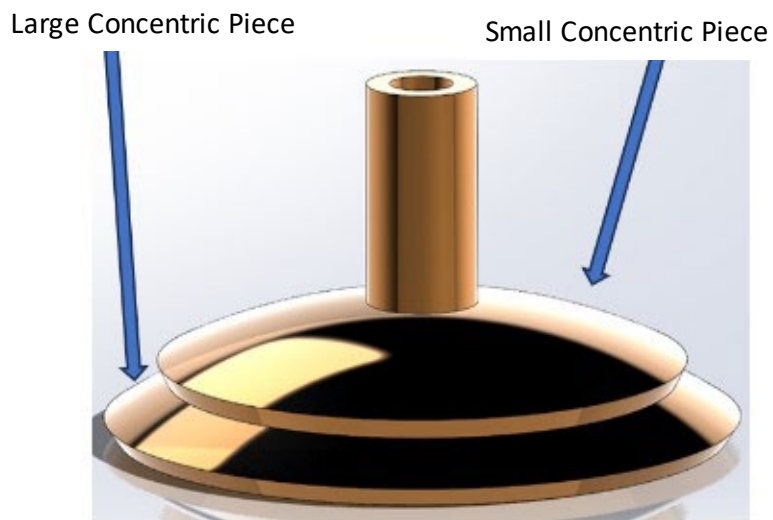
Sketch revolved around the axis to produce a 3D minor body piece.
